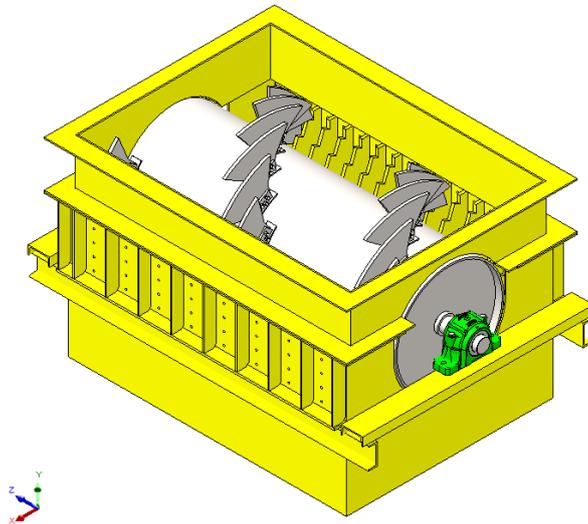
Drum design with blade arrangements assembled with the cutting chamber
